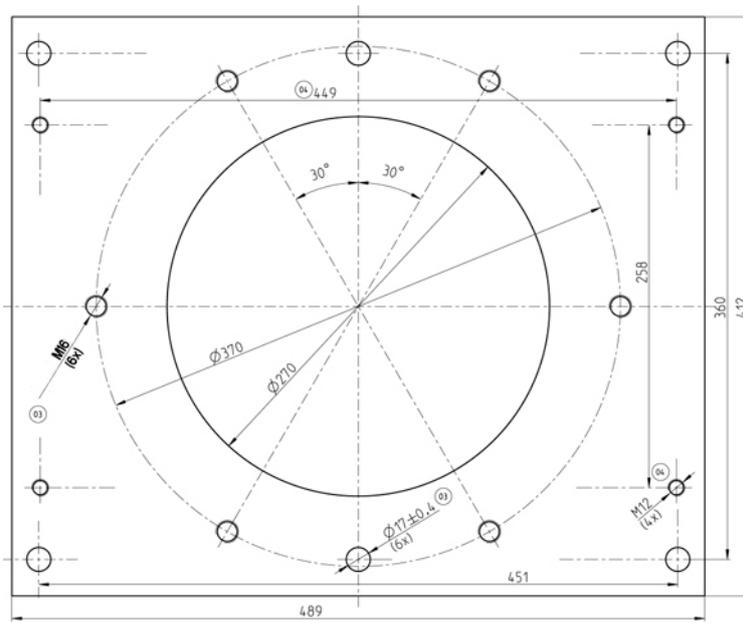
Ceiling Plate of Substructure for Dual Arm suspension dimensions
